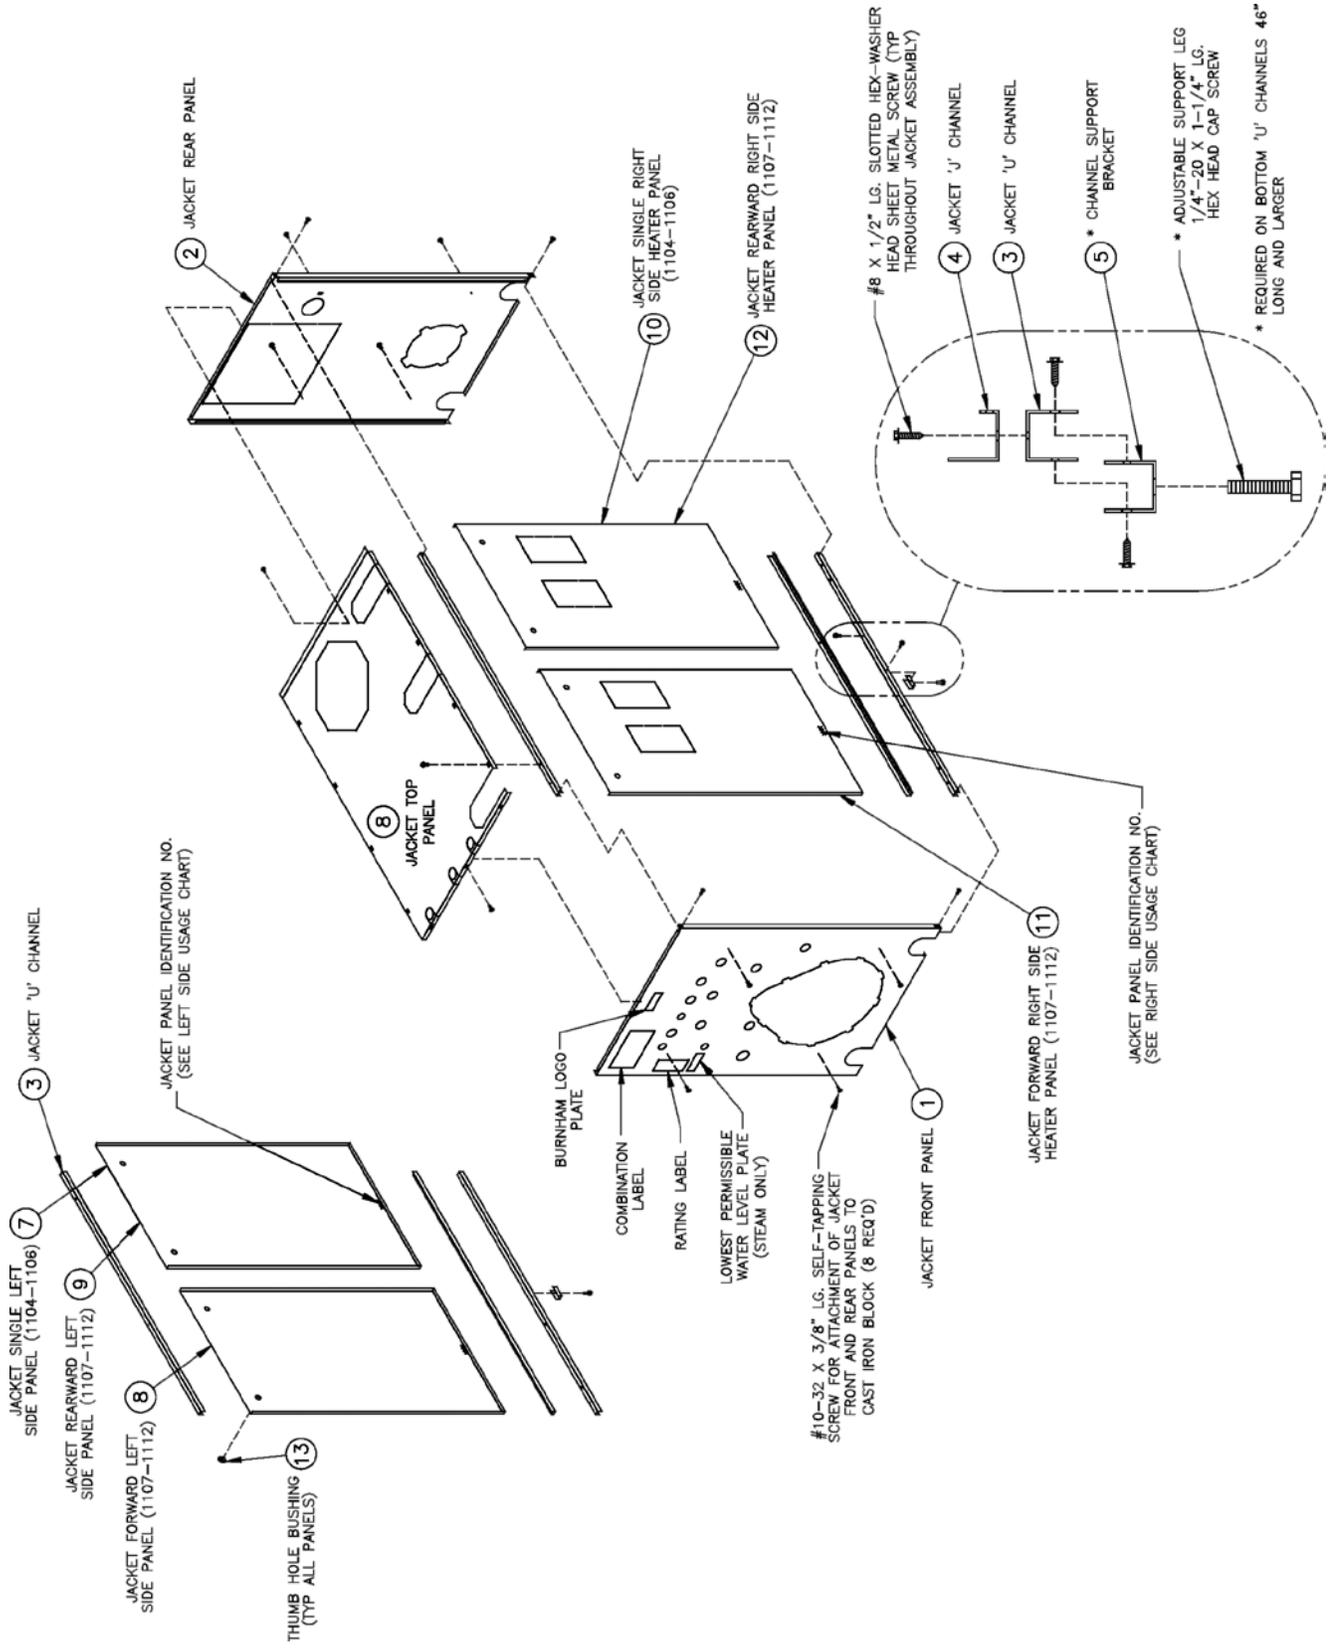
V11H Series Jacket Assembly (Boiler Models V1104H Thru V1112H)
